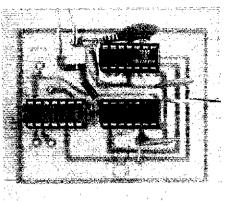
Parts placement guide for the 60-Hz clock board, not shown at actual size. These views show the component side of the board. J = wire jumper. See list of suppliers of ready-made boards at the end of Part 2.
